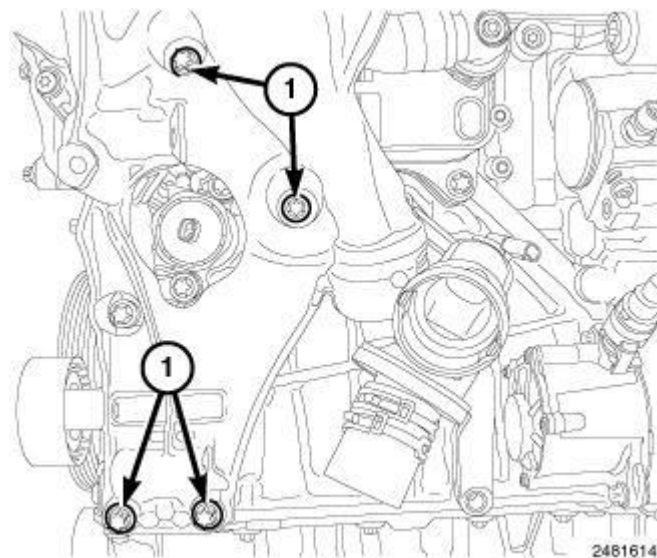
Accessory Carrier & O-Ring Gasket
